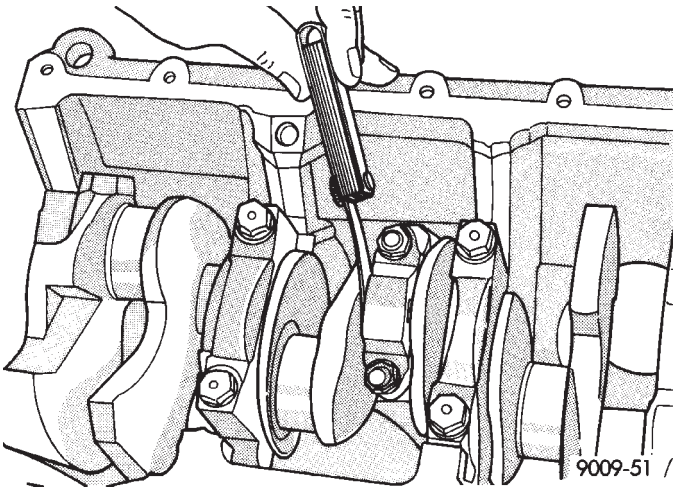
Checking Connecting Rod Side Clearance—Typical
